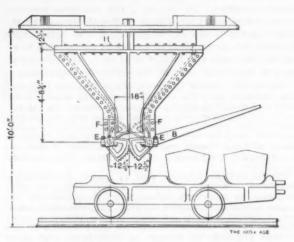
Specially Designed Valve for Drawing Limestone Kina.
